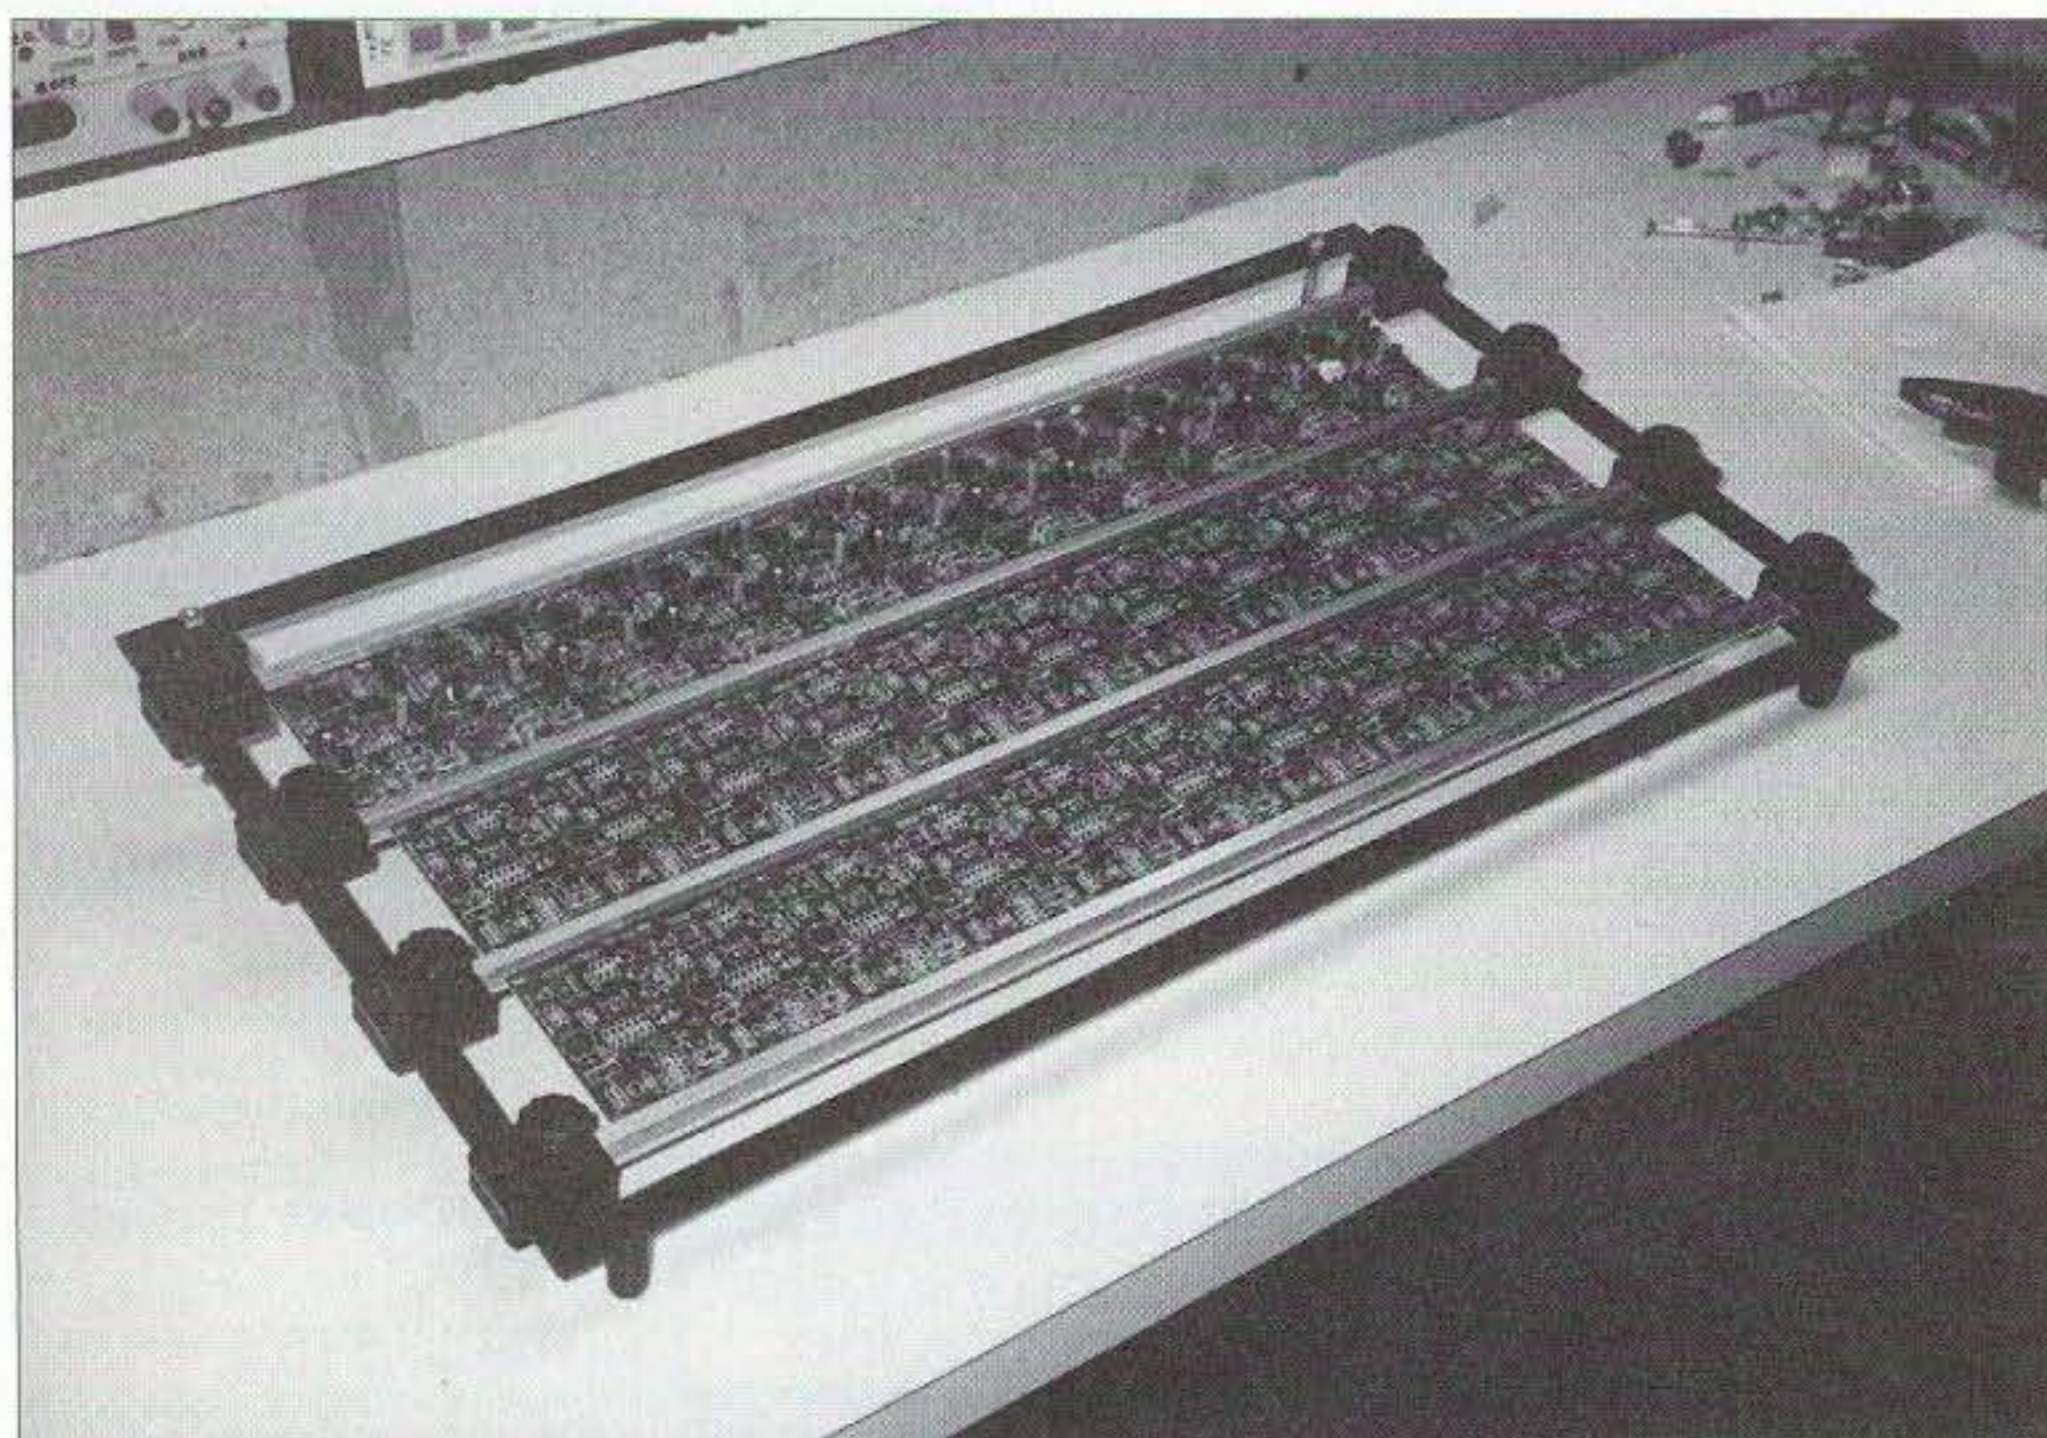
Photo B. Here's a rack of Micro M+ controllers being assembled. The rack will hold 33 PC boards. The top row of boards is already stuffed.
